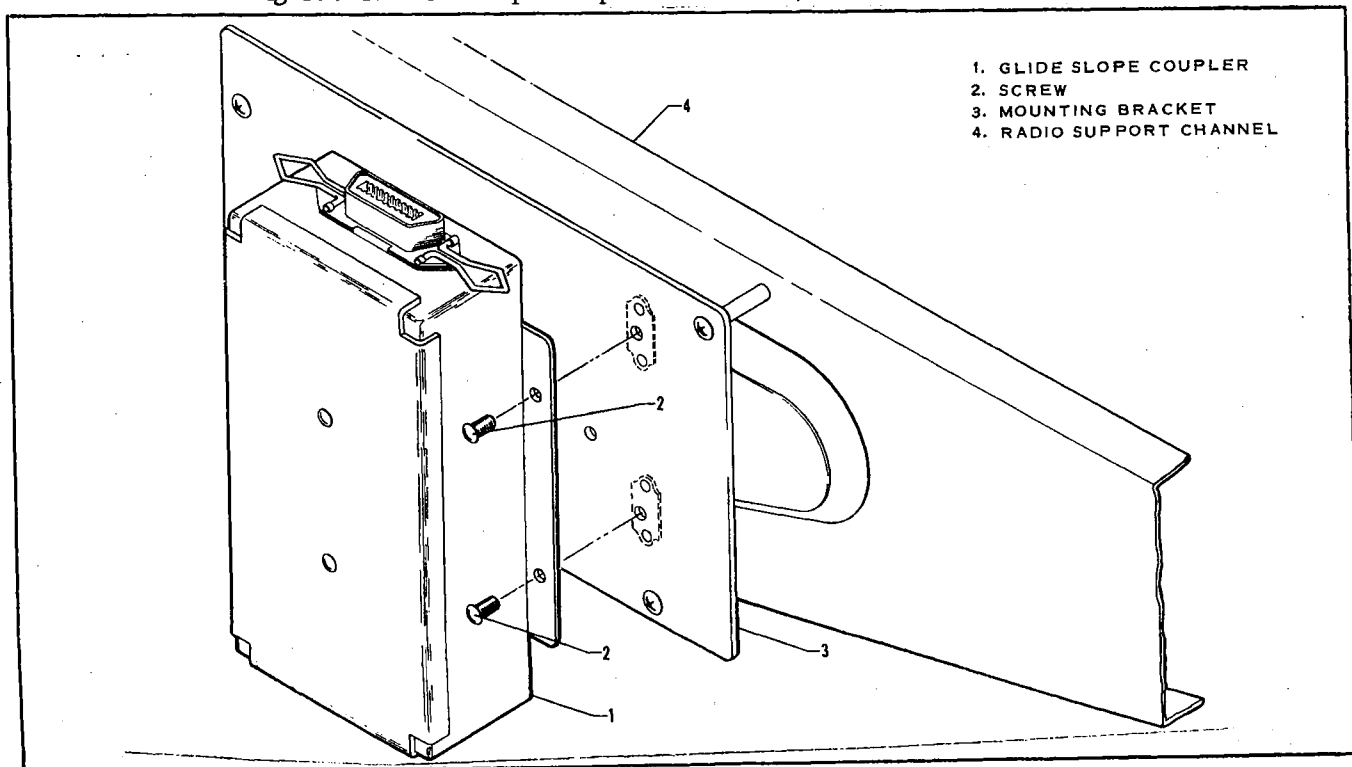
Glide Slope Coupler Installation, PA-24-260 and PA-39
